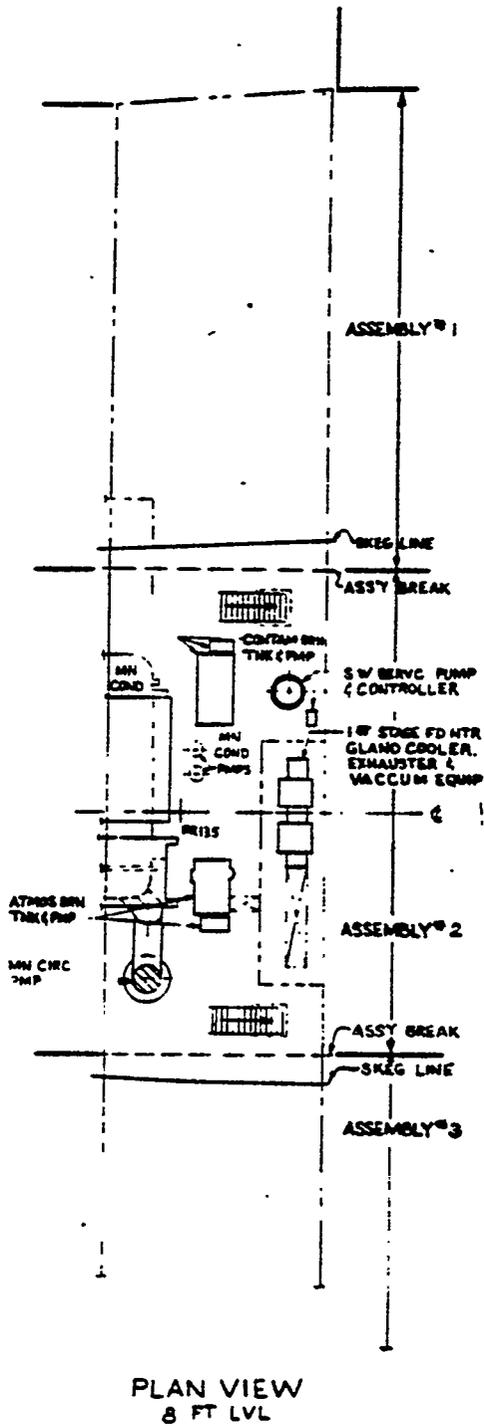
Steam Turbine Arrangement (Sheet 2 of 6)
